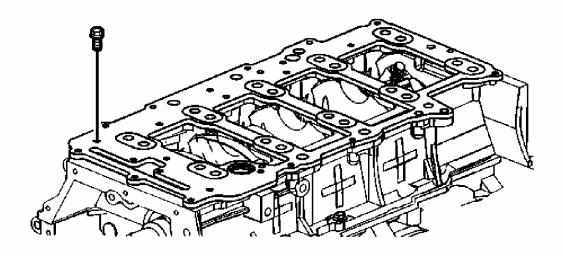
Identifying Oil Manifold Plate Bolts Courtesy of GENERAL MOTORS CORP.
